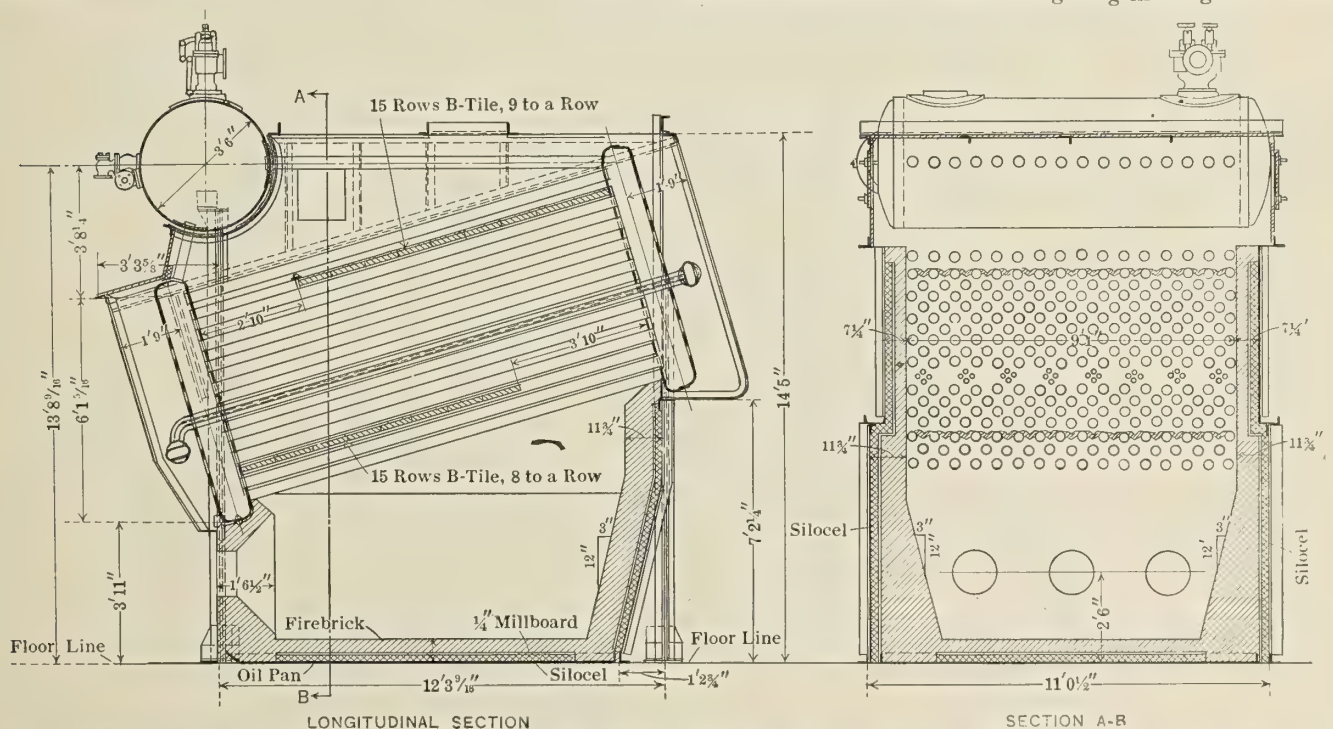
Arrangement of Setting for Heine Safety Boiler Built for the Emergency Fleet Corporation. This Boiler Has a Heating Surface of 3,170 Square Feet
